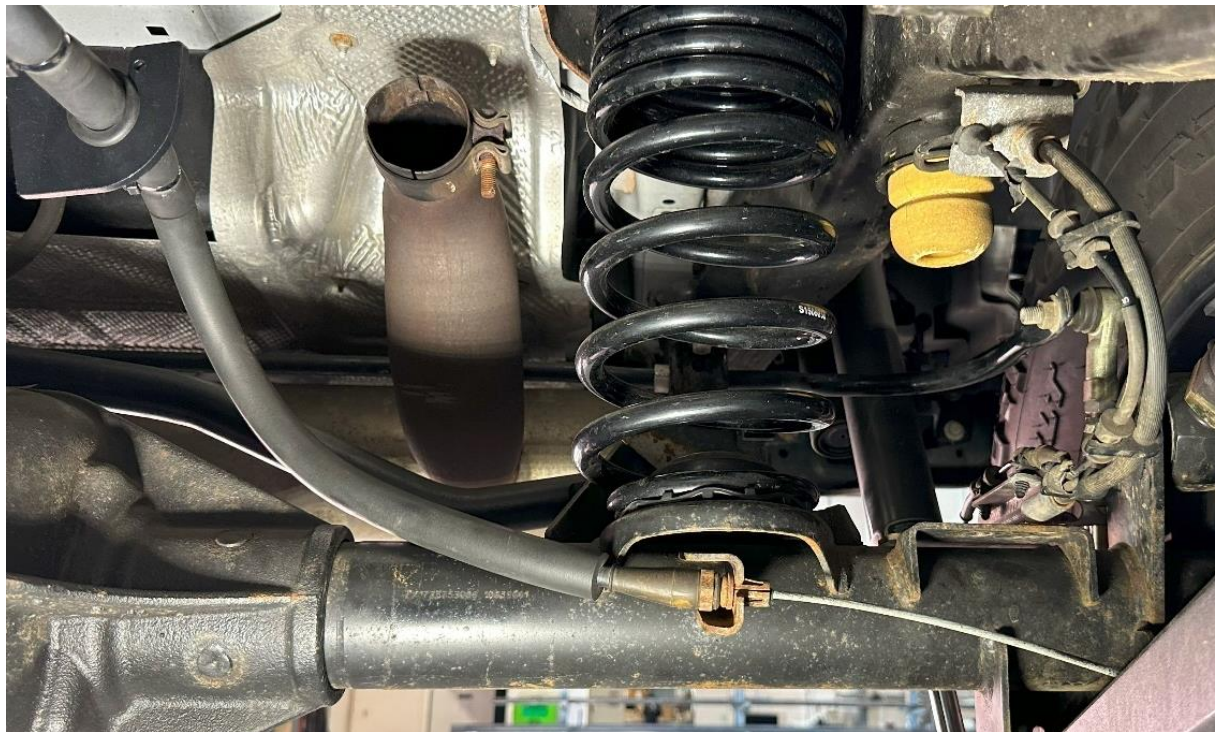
Parking brake cable housing reinstalled in axle bracket (rear right)
